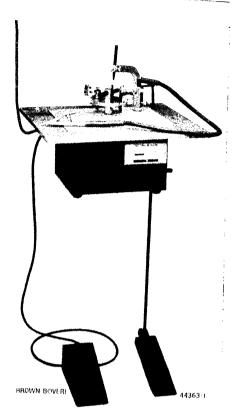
Soldering and welding apparatus Type TLsk 3, ready for service, countersunk mounting.
